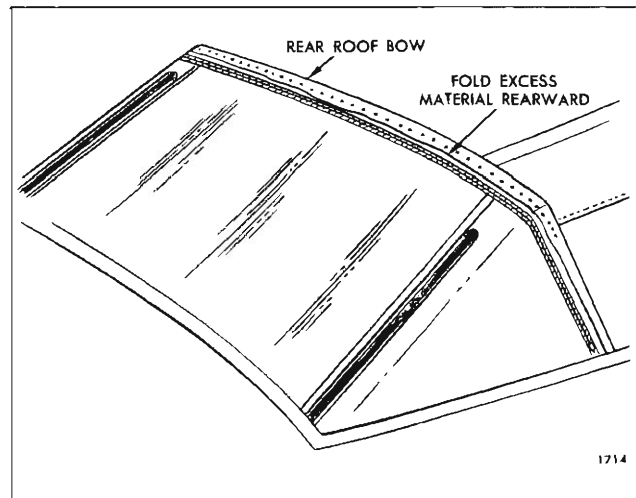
I-46 — Back Curtain Installation at Rear Roof Bow
